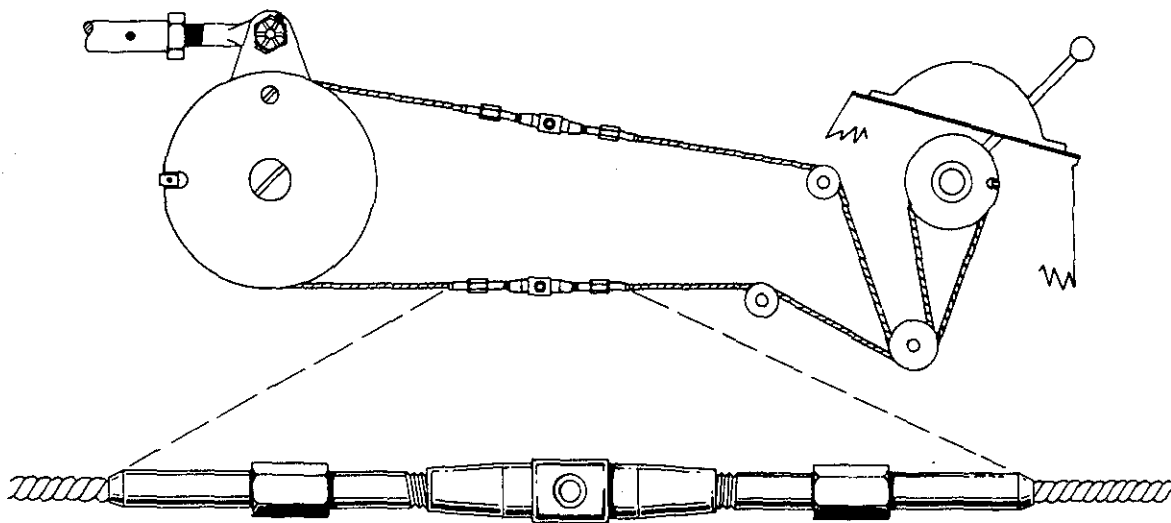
Engine control cable and turnbuckle assembly.
